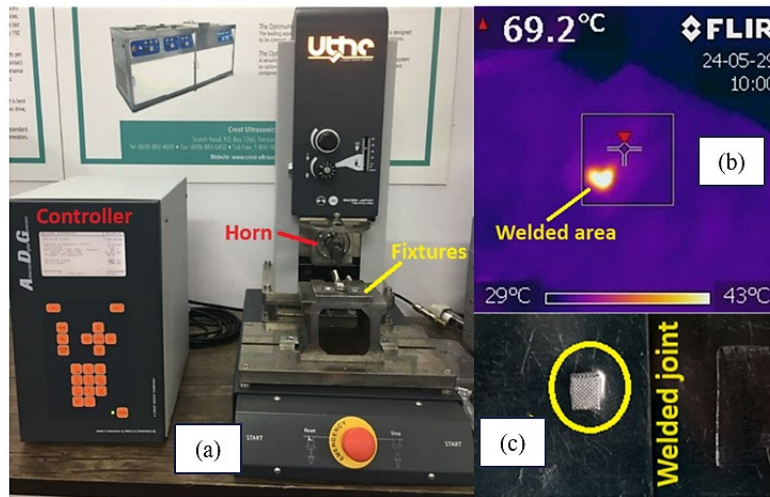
(a) Ultrasonic welding equipment, (b) Infrared thermal image, and (c) Welded joint
